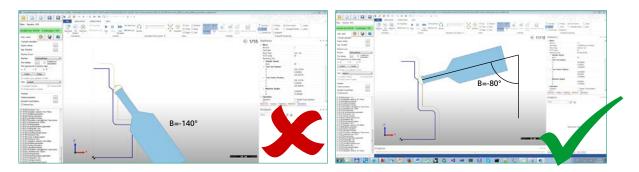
Algorithm to check if the tool/workpiece engagement is collision free
